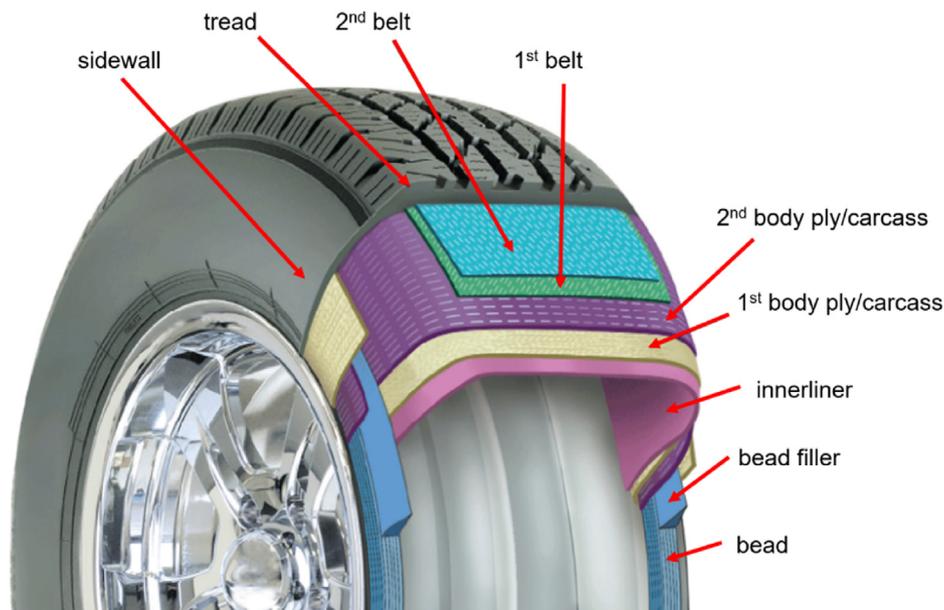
Exploded view of a commercial passenger car tyre. Adapted from [15].
